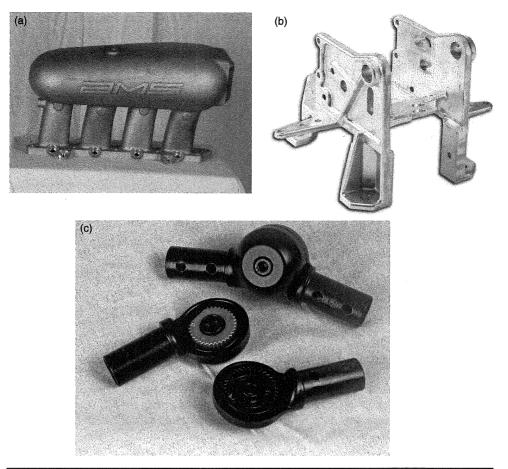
Examples of part consolidation and conversion. (a) This four-cyclinder intake manifold was cast in A356 aluminum via the green sand casting process. The casting was converted from a sheet metal weldment by Eagle Aluminum Cast Products, Muskegon, MI. The manifold is designed for the high-performance automotive aftermarket, specifically the Mitsubishi Evolution. (b) This steering/linkage assembly was cast in brass via the permanent mold casting process. The casting was converted from a multipiece weldment by Piad Precision Casting Corp., Greensburg, PA. The assembly is used in a pallet truck application and delivered the customer a 10% weight reduction over the weldment. (c) This locking hinge assembly was cast in 4140 steel via the investment casting process. The casting was converted from an aluminum fabrication by Signicast Investment Castings, Hartford, WI. The locking hinge fits on a wheelchair and is more durable than its aluminum counterparts. (From Spada [3].)
